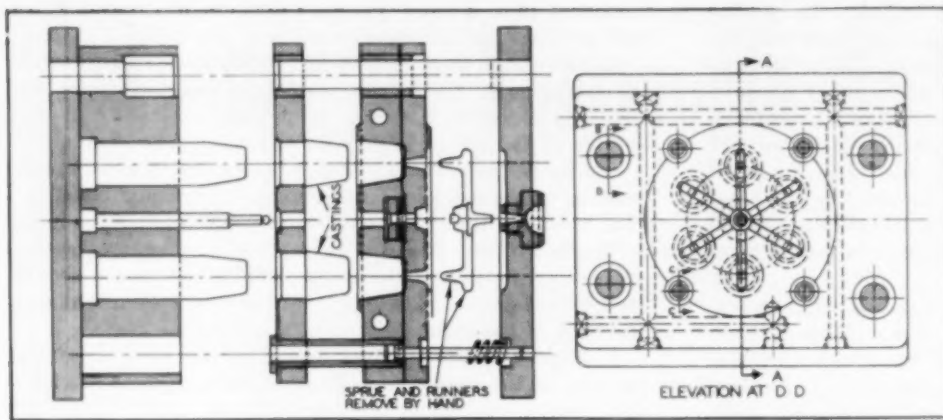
This six-cavity mold was designed with an extra sprue plate. It consists of four parts as follows: adapter plate with main sprue bushing and half runners; cavity plate bolted to a plate with auxiliary sprues and half runners; stripper plate; and mold base consisting of corepin block and adapter plate.
